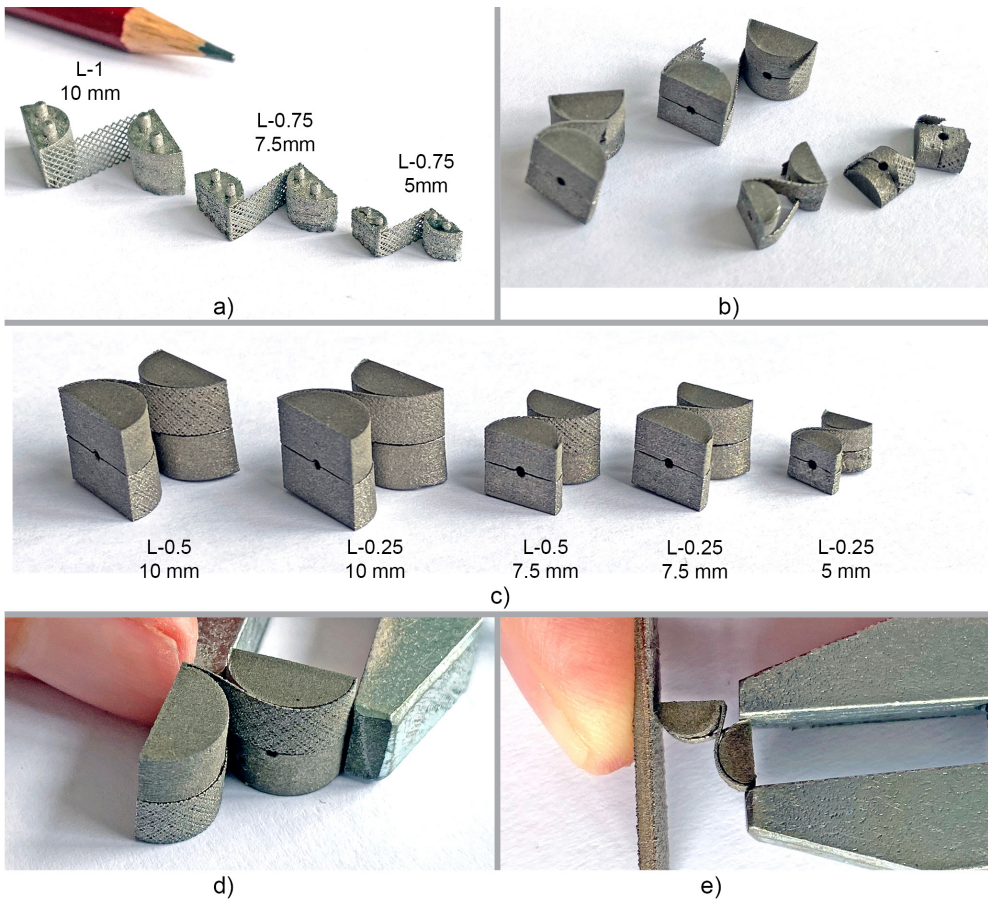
3D printed rolling contact joints. a) Single 3D printed joint halves. b) Some of the broken assembled joints. c) The successfully assembled joints. d) The 10 mm L-0.5 joint illustrating a bending angle of 90° . e) The 5 mm L-0.25 joint illustrating a bending angle of 90° .
